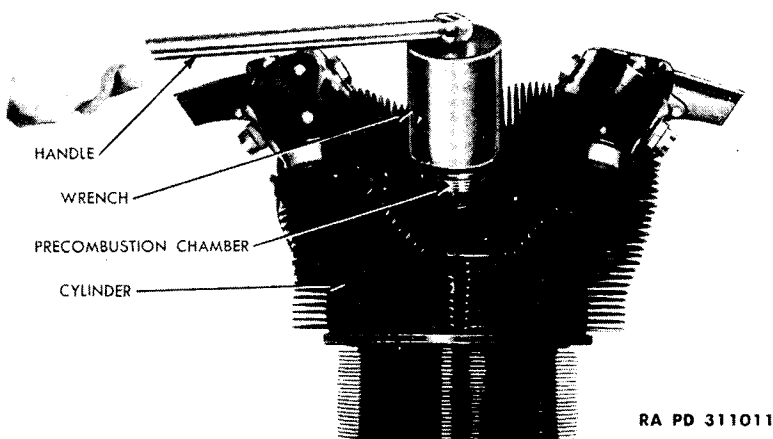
Removing Precombustion Chamber, Using Wrench 5A1937
